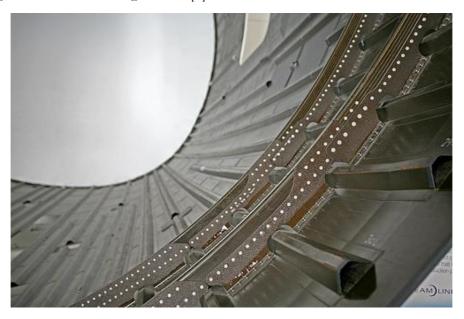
Disassembled fuselage section of Boeing 787 Dreamliner [3]
